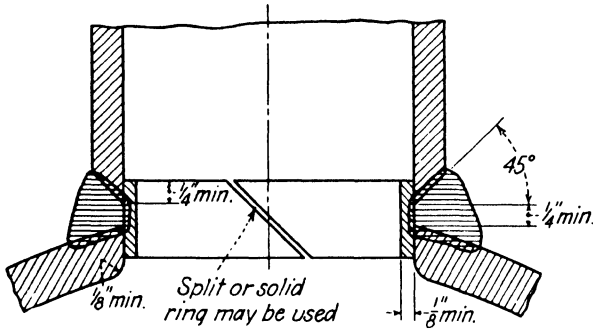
Outlet connection. Backing ring to be removed by machining after welding.
